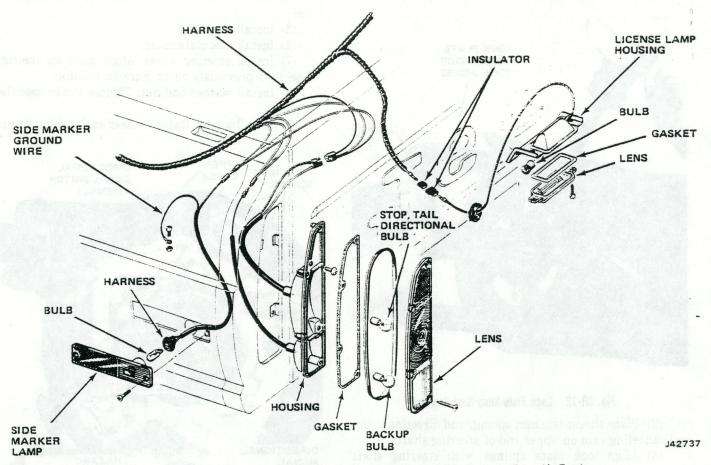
R-10 Rear Directional, Stop, Backup, Taillamps and Side Marker—Townside Truck
